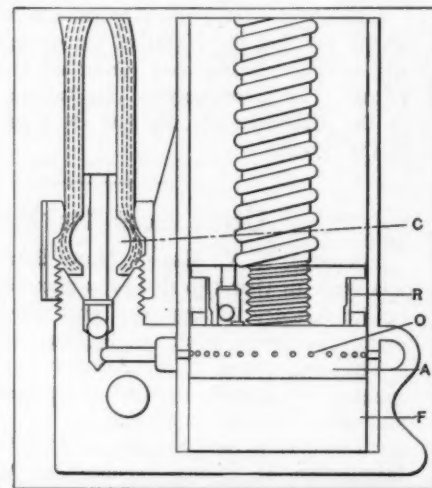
Sectional view of the Pitner tire pump, showing the different working parts
